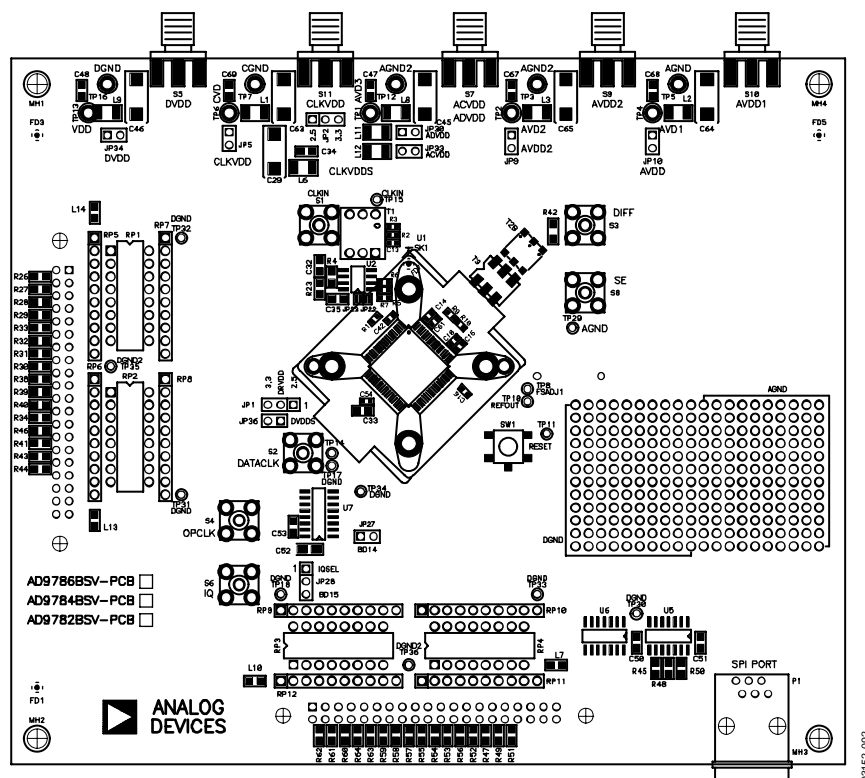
PCB Assembly, Primary Side, Rev. F Evaluation Board
